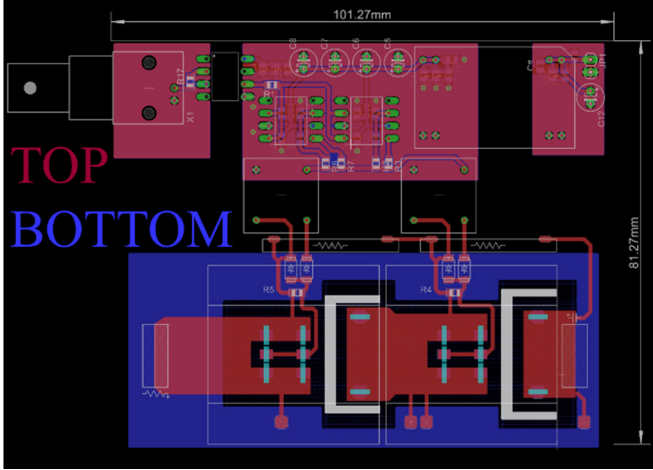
LTD brick PCB design with series thyristor switching. Red – Top of PCB, Blue – Bottom of PCB
